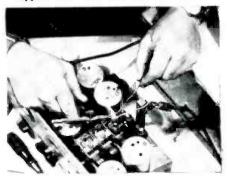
Using the resistance welding technique in soldering two component parts.
